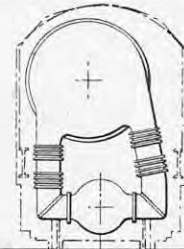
SECTION B-B VIEW ON COMBUSTION CHAMBER INLET.
